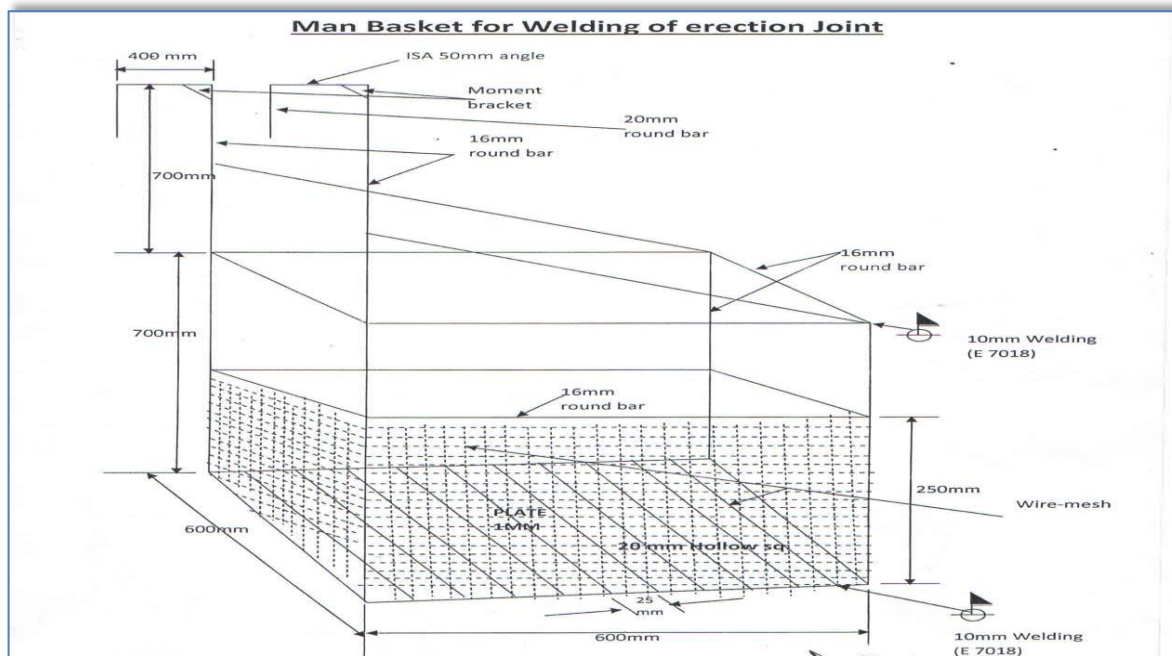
Man Basket for Welding Erection Joint
